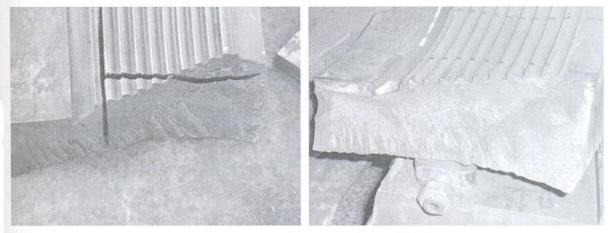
Appearance of some fracture surfaces of the broken part
